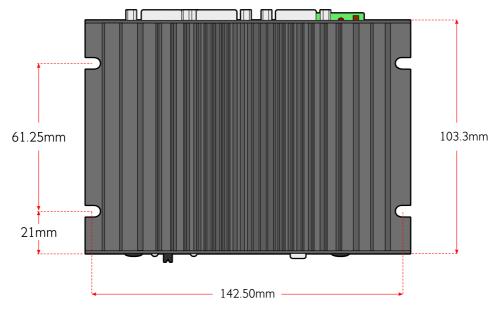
Dimensions of the VIA AMOS-820 (top view)
